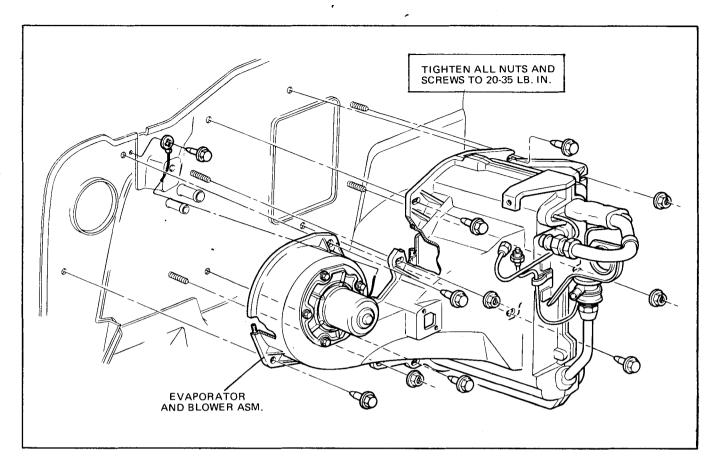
A-116 A and G Series Evaporator Core and Case Installation
